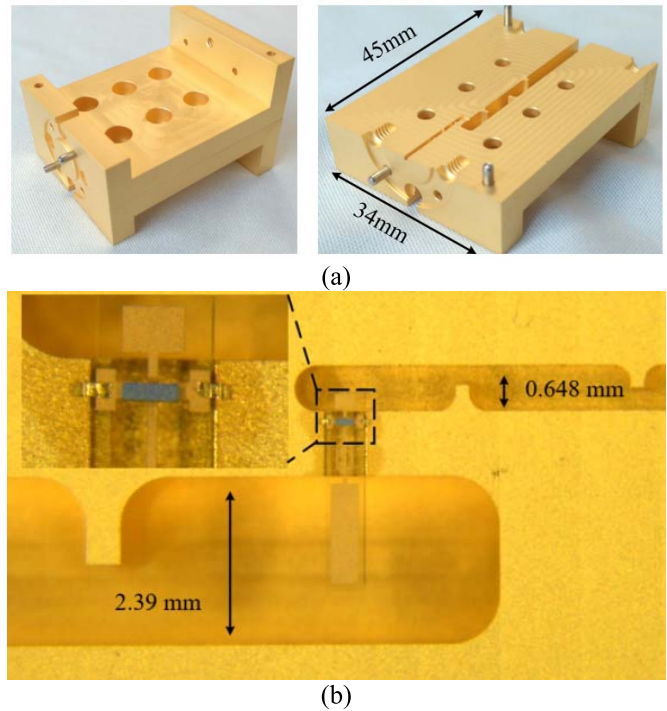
Photographs of the fabricated tripler. (a) Assembled and split tripler block. (b) Enlarged views of the MS circuit area.
